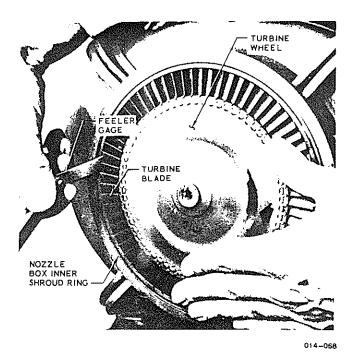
Checking Gas Producer Turbine Blade Radial Clearance
